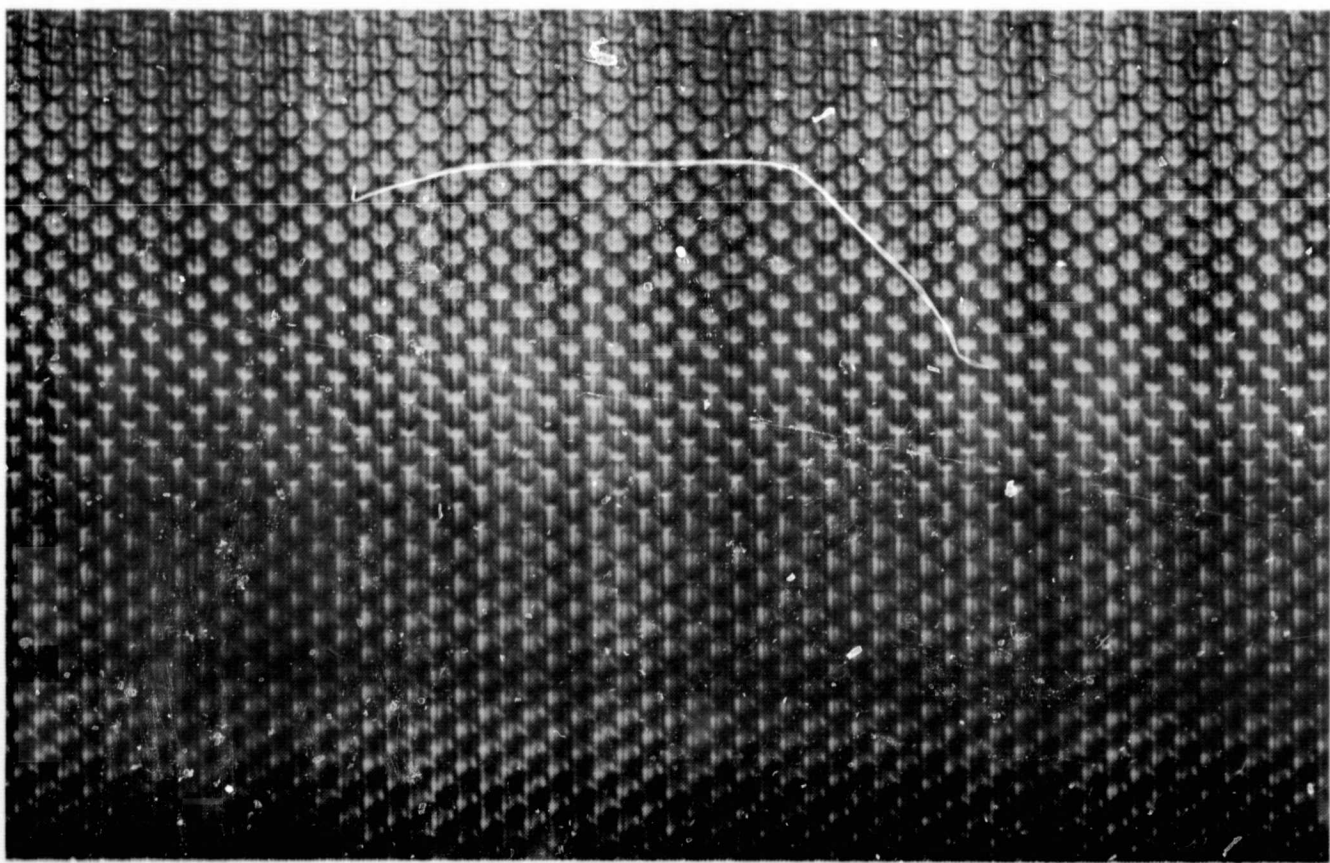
Typical x-ray view of honeycomb panel L9000002-1001 - bottom surface.
